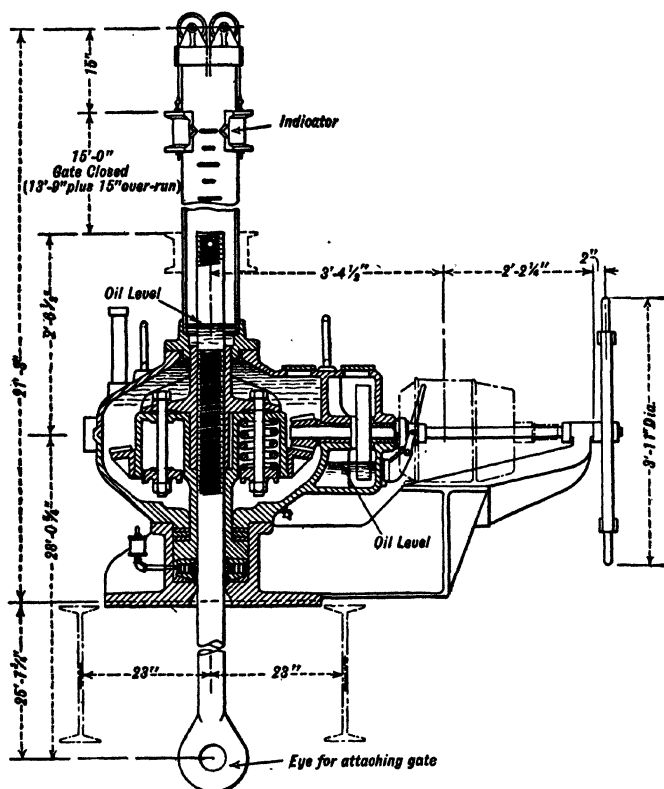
Screw Type Gate Hoist Installed at Spiers Falls, N. Y. For Head Gate 18 Feet Wide, 12 Feet High under 30 Foot Head. Lifting Capacity 150,000 lb., Downward Thrust 50,000 lb. M. H. Treadwell Co., Manufacturers.
